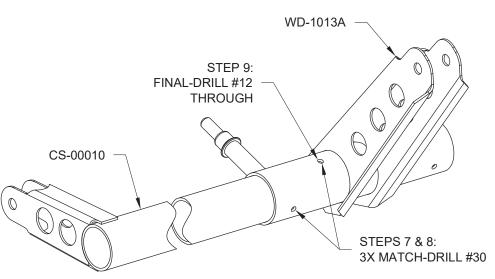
DRILLING FLAP CRANK AND TORQUE ARM (LEFT SHOWN)
